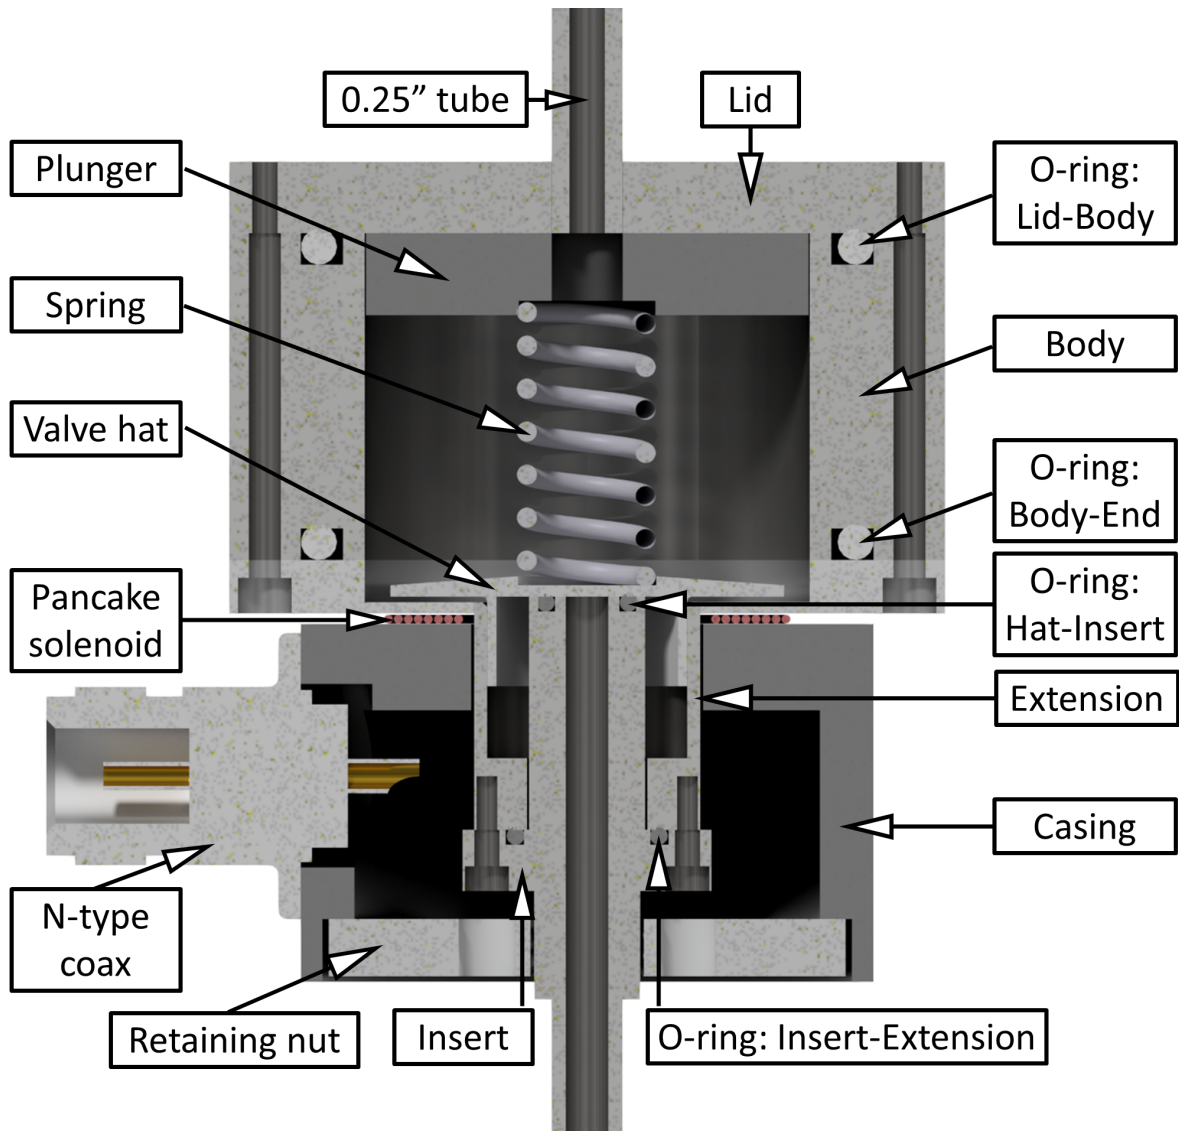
Labeled valve cutaway to be used as a reference in the following relevant engineering drawings
